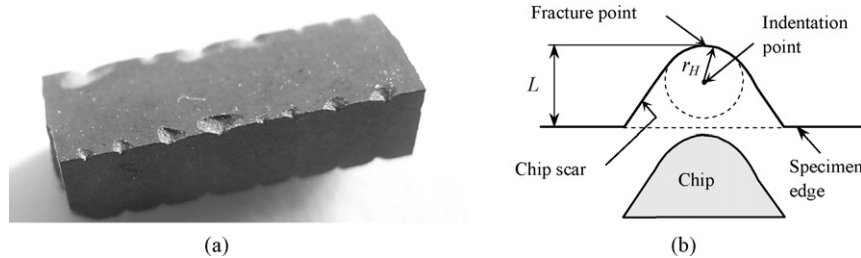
NKKKM-80 specimen cut out from a nozzle vane (a) with chip scars on its edges (side view) and schematic of the fracture zone after the Rockwell indentation (b); r_H is the radius of a Hertzian ring crack.
